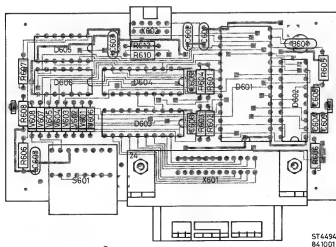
IEC-625/IEEE-488 interface pcb, lay-out, conductor side
